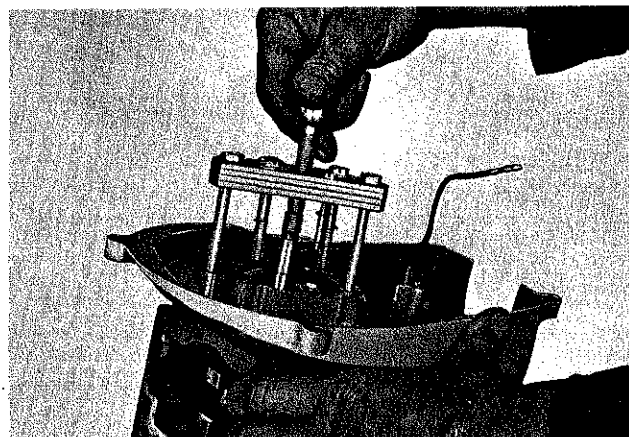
Removing the crankcase cover with a pulling tool. The pulling tool is used when it is desired to remove only the crankcase cover. In almost all cases, the ball bearing will remain on the crankshaft.
